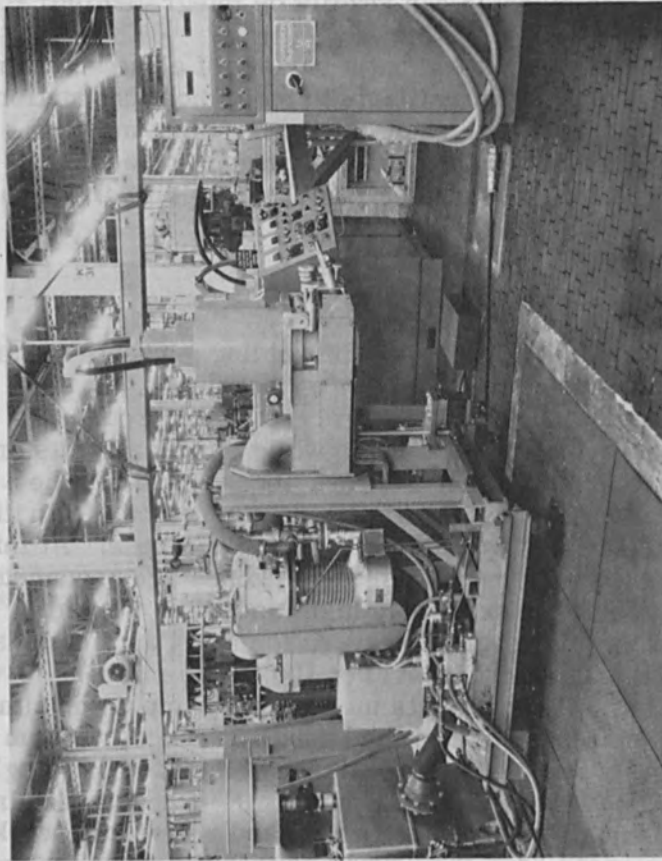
Nonvacuum Electron Beam Welder.
